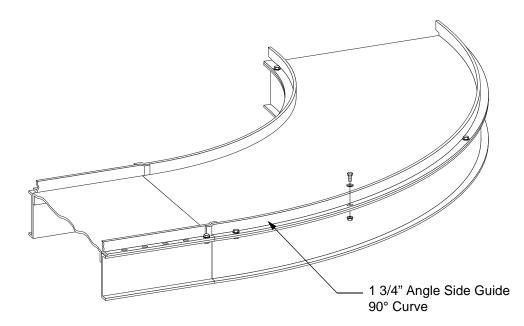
1 3/4" Angle Side Guide, 90°Curve, Direct Mounting
